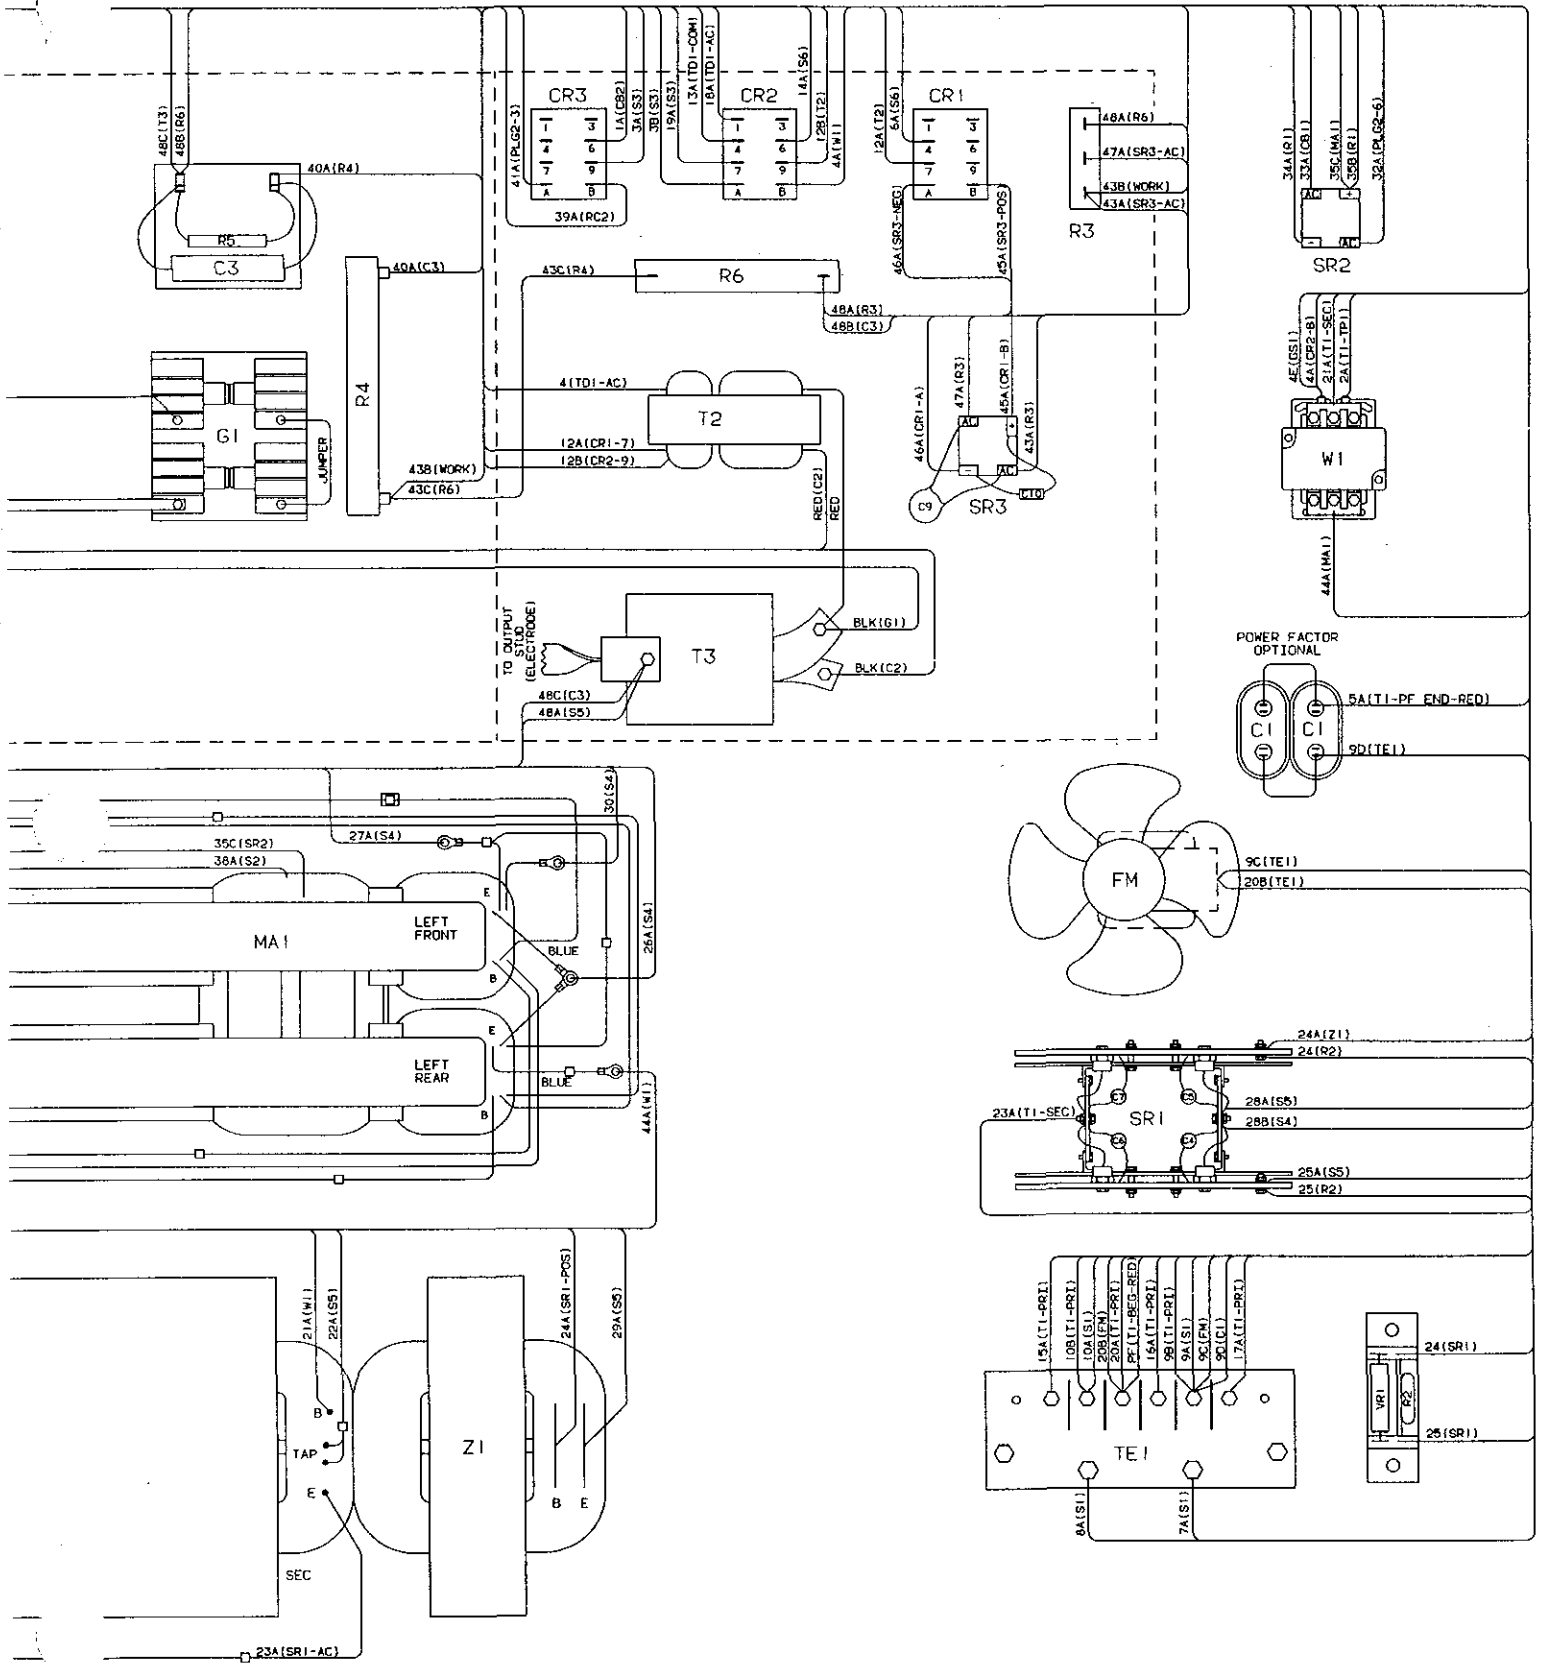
Wiring Diagram For Welding Power Source
